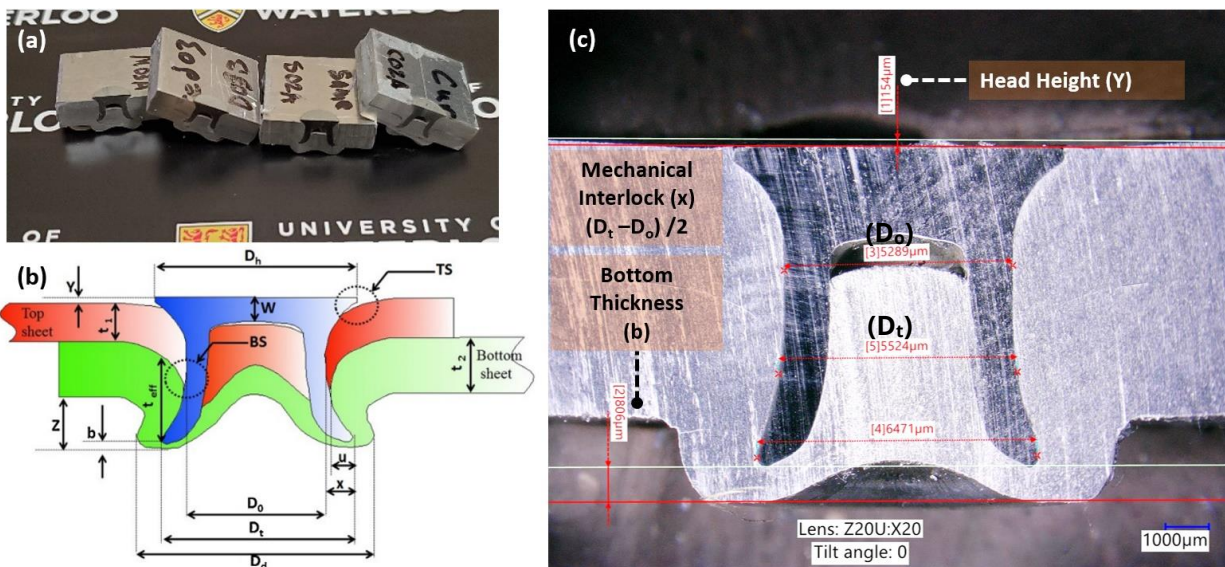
Cross-sectional view of SPR joints; (a) Sectioned joint ready for physical attributes measurements, (b) SPR cross-sectional parameters (Li *et al.*, 2017), and (c) physical attributes measurements.
